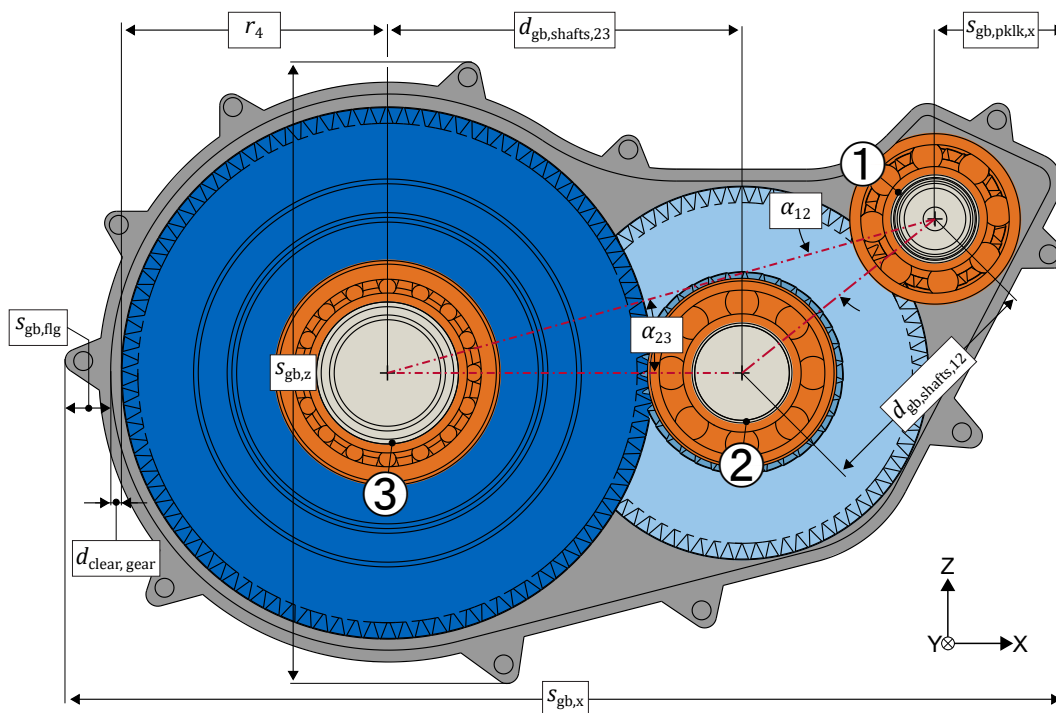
Typical arrangement of a parallel axle gearbox. The figure shows the first shaft ① (which is directly connected with the electric machine), the middle shaft ②, and the differential (or output) shaft ③.
